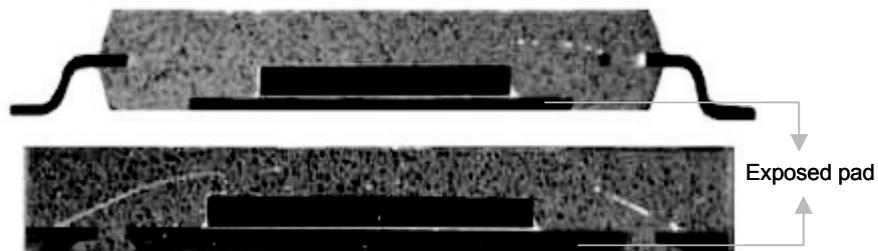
Examples for exposed pad packages: gull wing leads (top) and QFN version (bottom).
